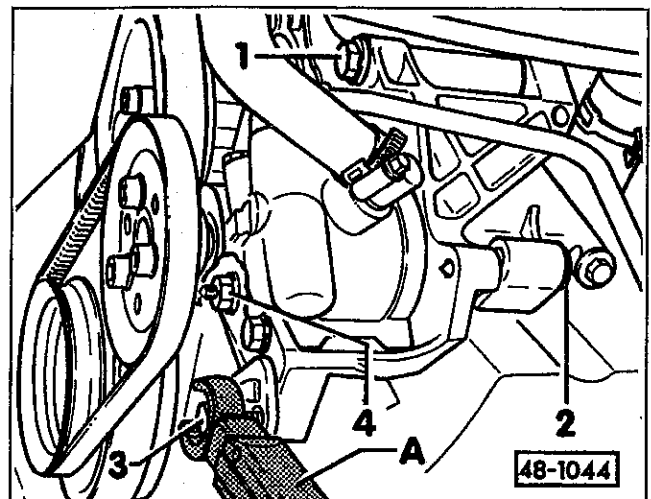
To remove V-belt, loosen bolts 1, 2, 3, and nut 4. Belt tension is adjusted at tensioning nut using torque wrench (A).
